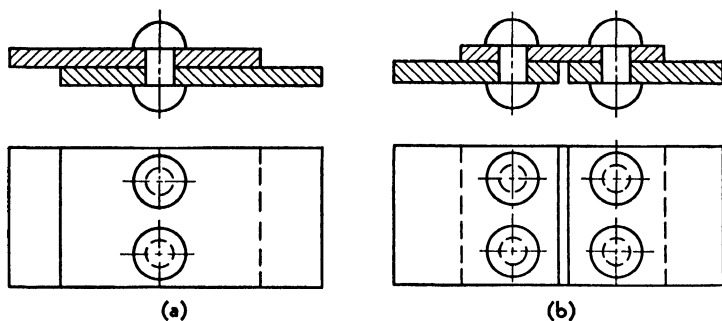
Types of riveted joints: (a) lap joint, (b) butt joint.
